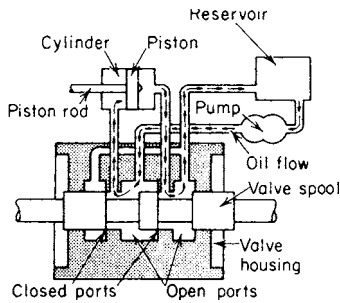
Control valve positioned for full-turn power steering assistance using maximum pump pressure.
